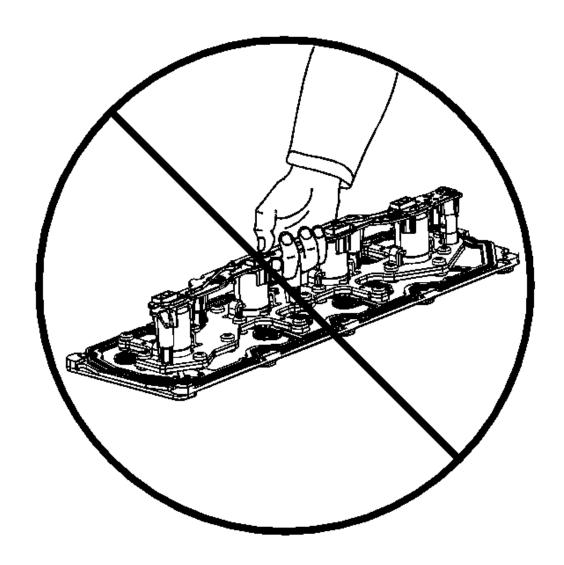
Valve Lifter Oil Manifold Courtesy of GENERAL MOTORS CORP.
